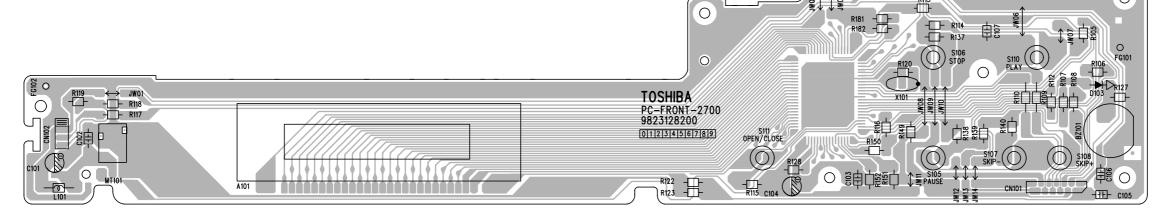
EU03 Front Display PC Board (Top Side)
